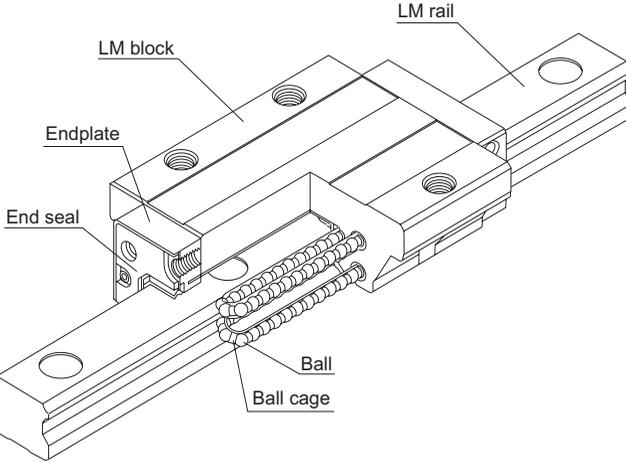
Structural Drawing of the Caged Ball LM Guide Model SHS
